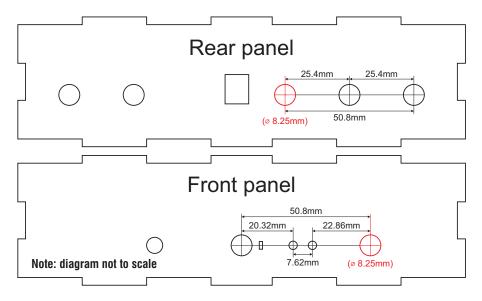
here's where to drill the extra holes in the rear panel (for the mixed output RCA socket, CON5) and in the front panel (for panpot VR2) if required
